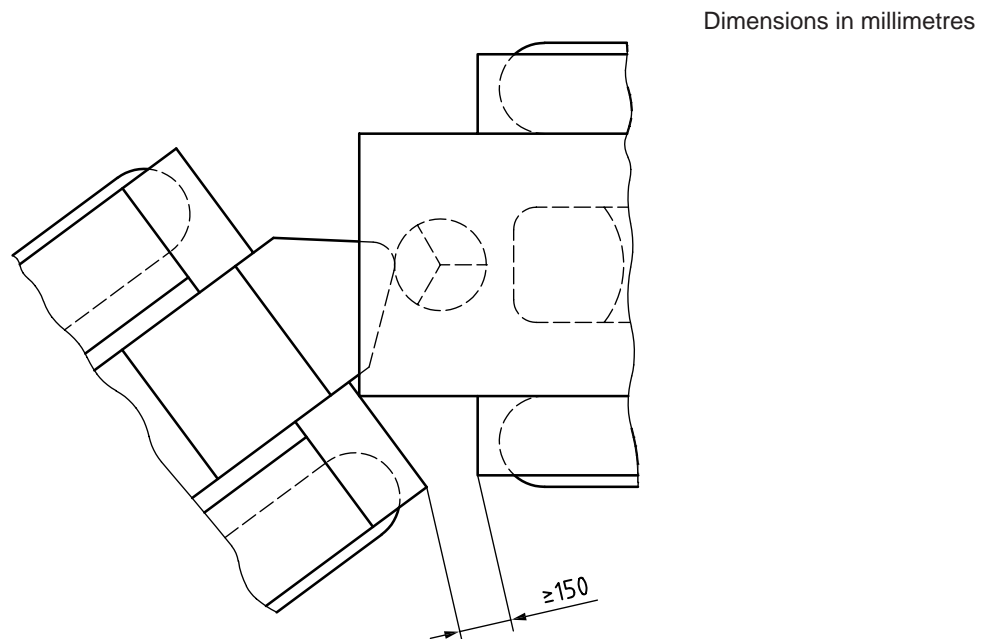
Minimum clearance of lower limb for access to operator's cab on machines with articulated steering
